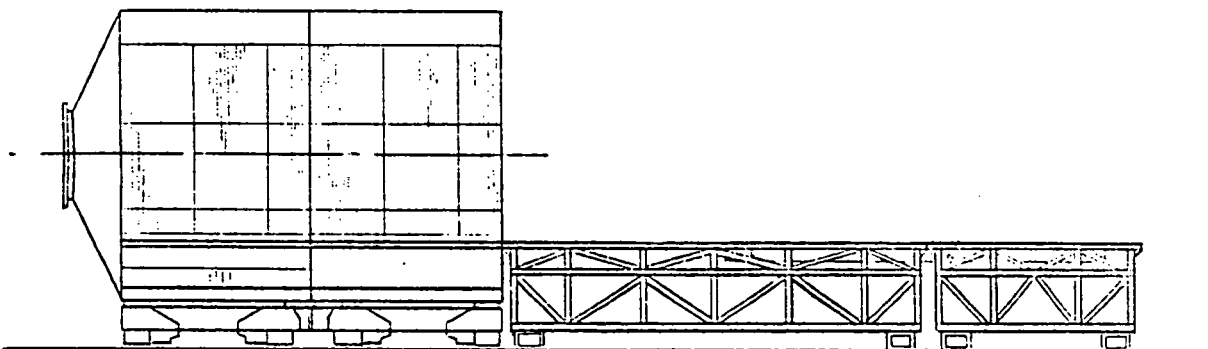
7 e Rack and Floor Installation/Removal Braces Kit Removed
